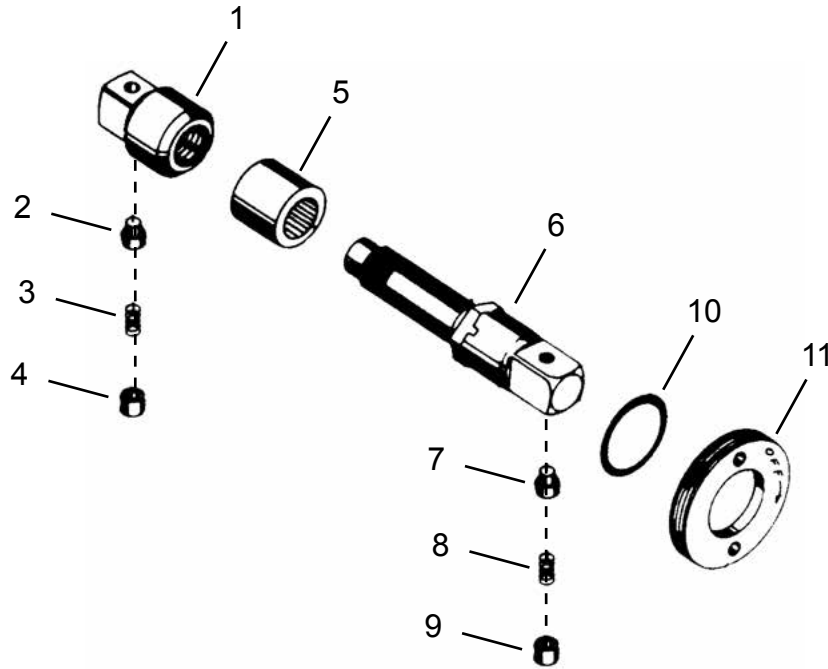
": Right Angle Hold & Drive Attachment - Code "VHD"
